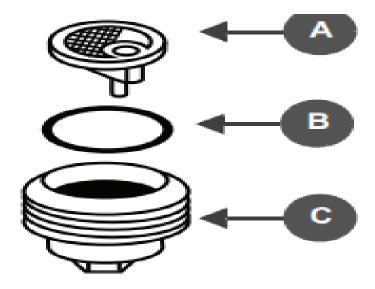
Fuel Sediment Cup Assembly by using exploded assembly
